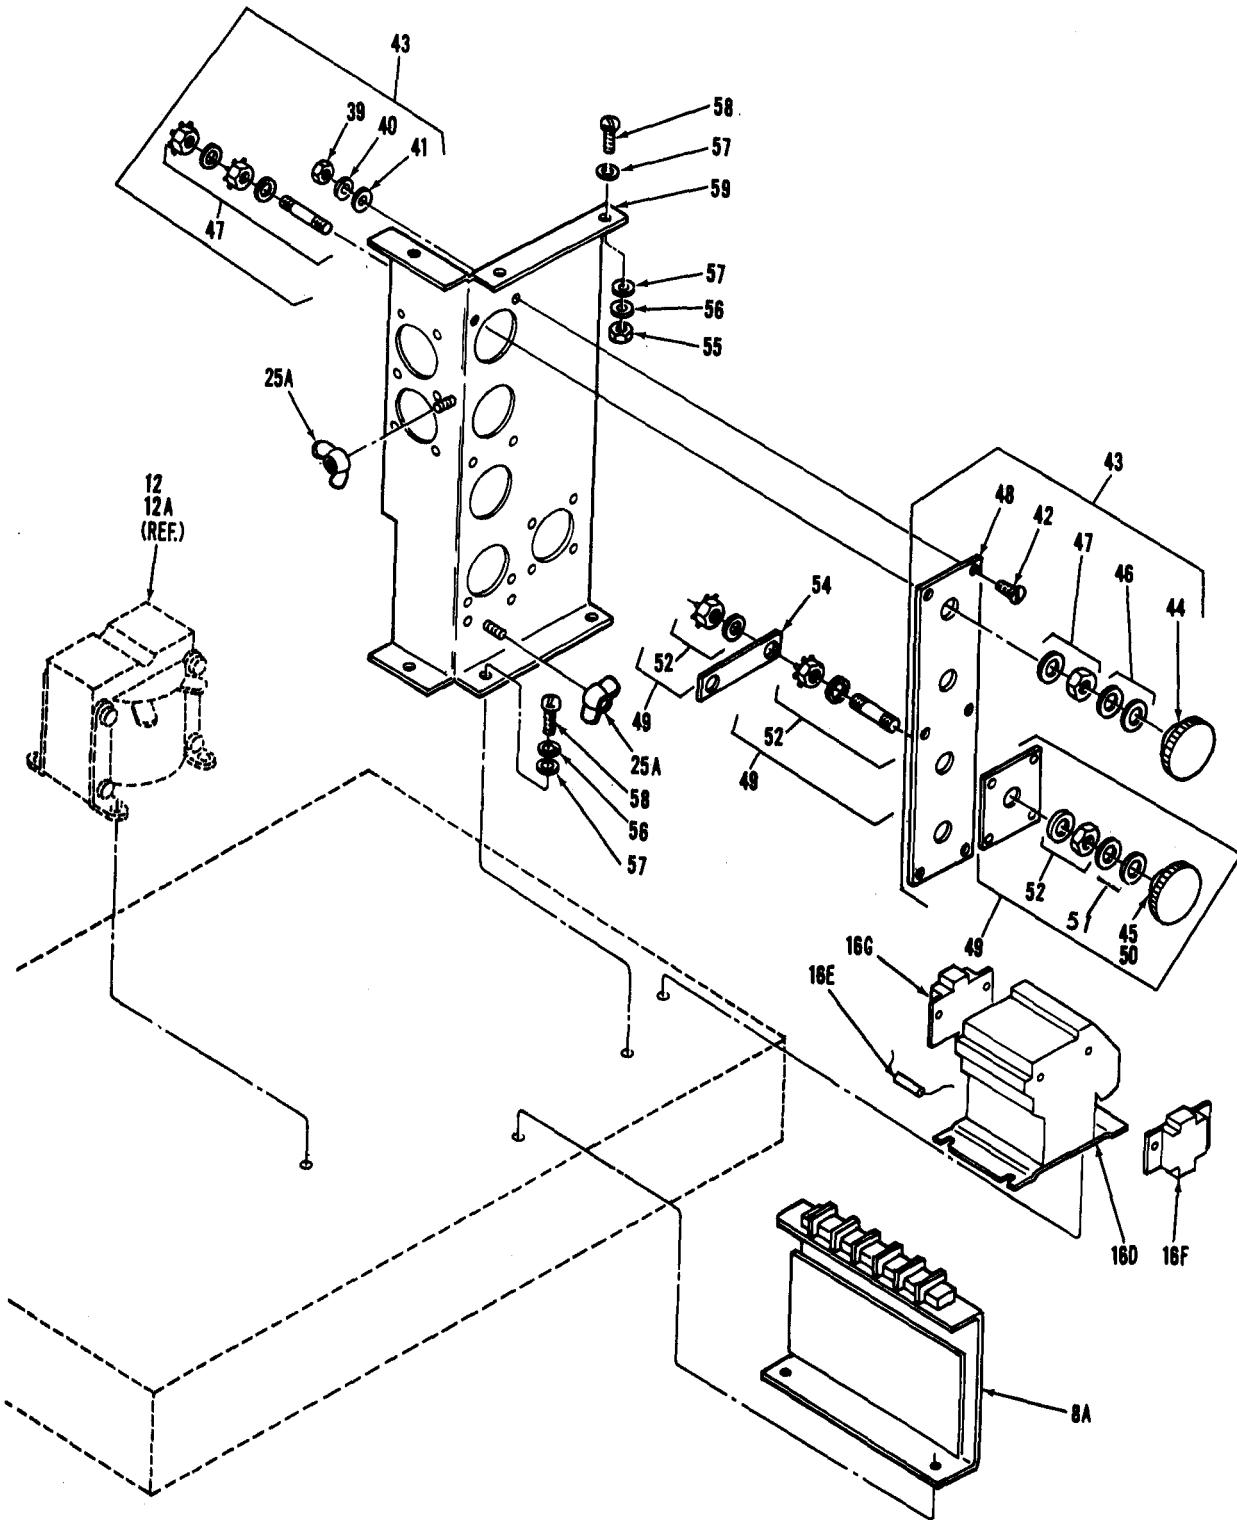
Sensing module, control transformer, and terminal board (Sheet 2 of 2).
